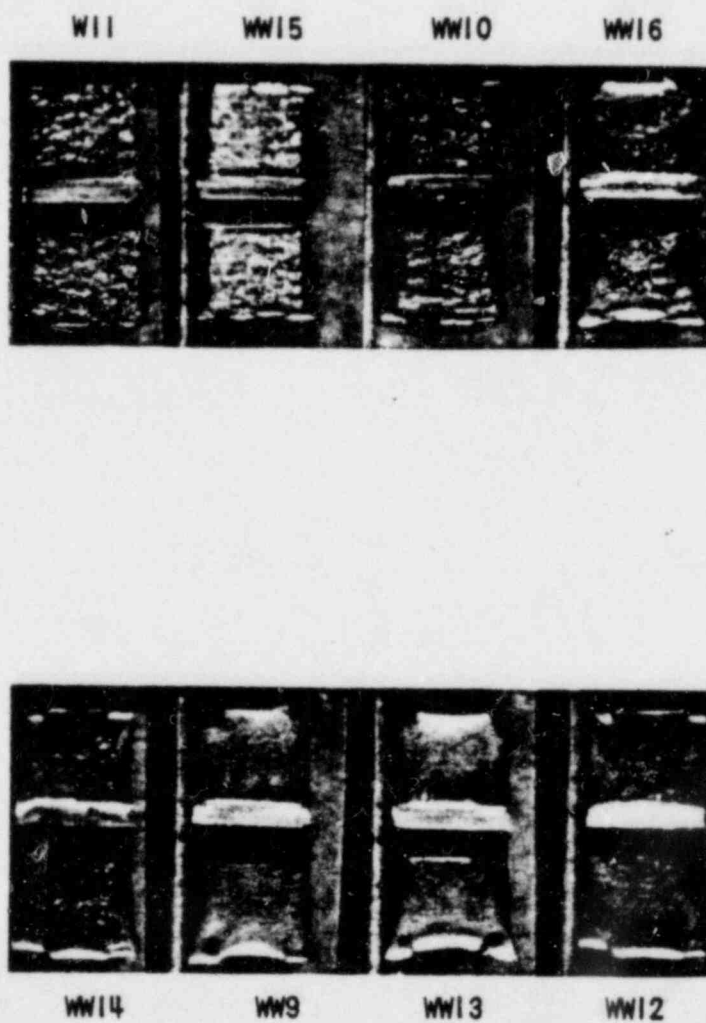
Charpy Impact Specimen Fracture Surfaces for Point Beach Unit No. 1 Weld Metal
